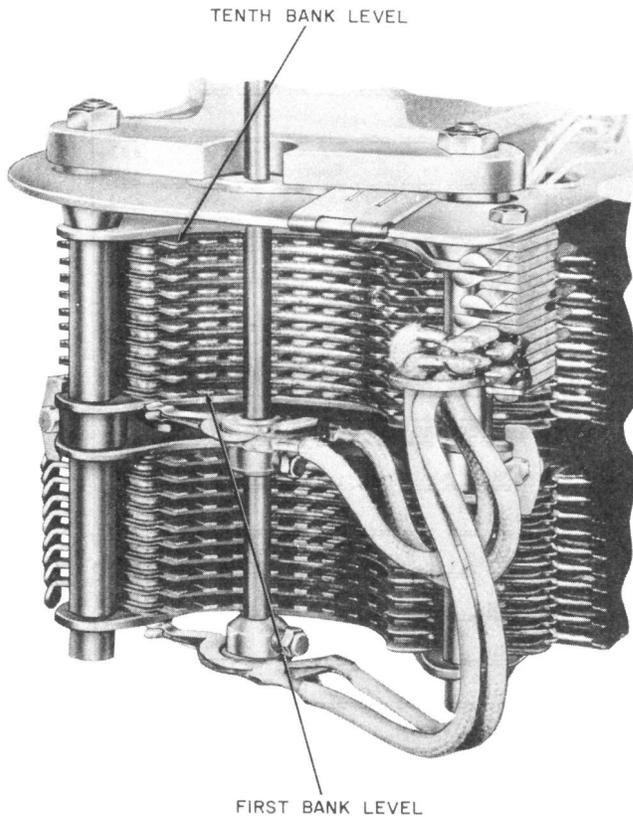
Step-by-Step Switch Bank Assembly and Mounting
